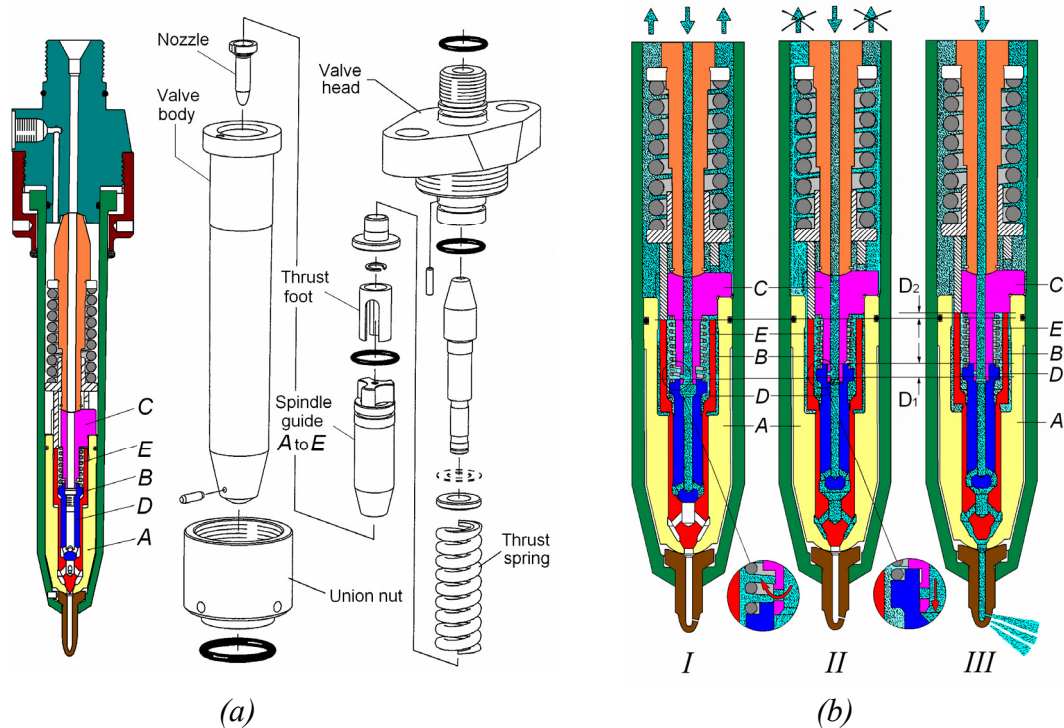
Cross-sectional schematics of fuel injector from engine E, (a) complete assembly [221], (b) three positions of injector operation [222].
